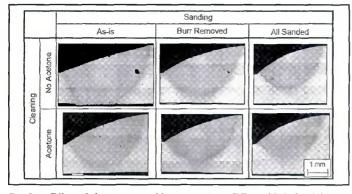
Effect of cleaning on weld cross sections. Fillet welds in lap joints on 1.5-mm-thick aluminum Alloy 5182 at 1 m/min.
